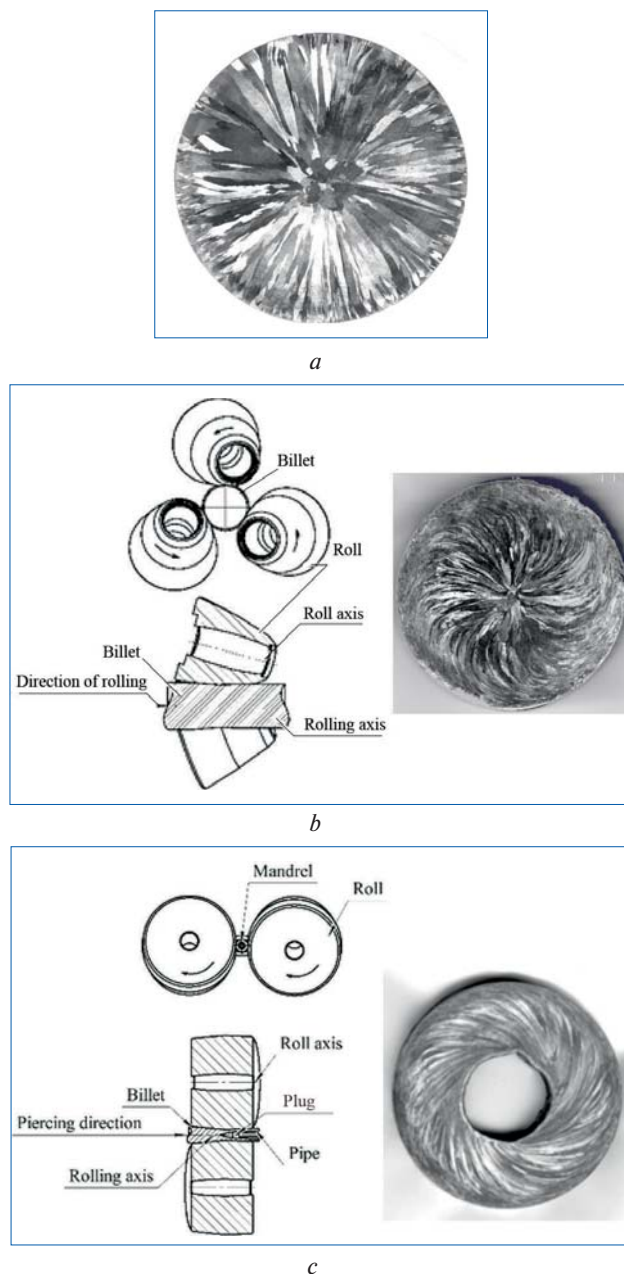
Macrostructure transformation of the initial cast billet (a) after rolling in the three-roll mill (b) and piercing in the two-roll mill (c)
